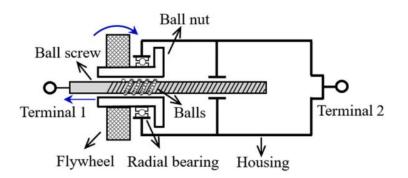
Schematic Drawing of Ball-Screw Inerter [15]
